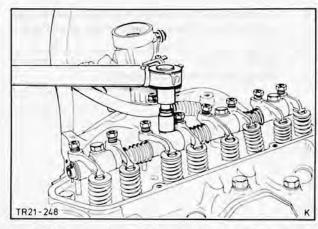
Torque rocker shaft bolts as specified in Technical Data
